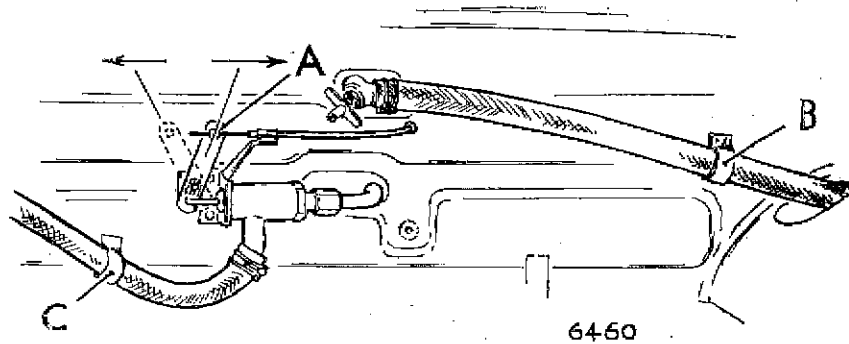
Cable adjustment, bleed valve (early cars) and correct method of retaining hoses
